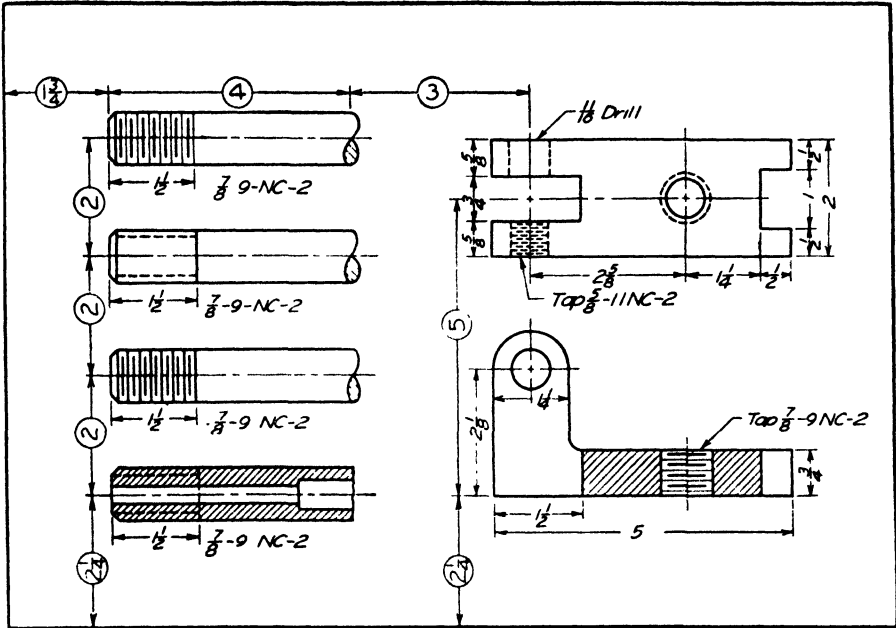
Prob. 222. Draw the conventional thread representations as specified on the layout.
